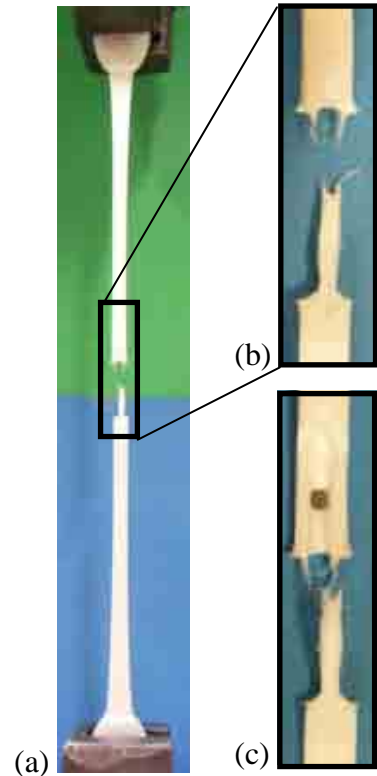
(a) Specimen profile at failure in the tensile test of the sample with a chip inside (SC/0/90) coated with Teflon, (b) enlarger broken section, (c) enlarger broken section from the other side.
